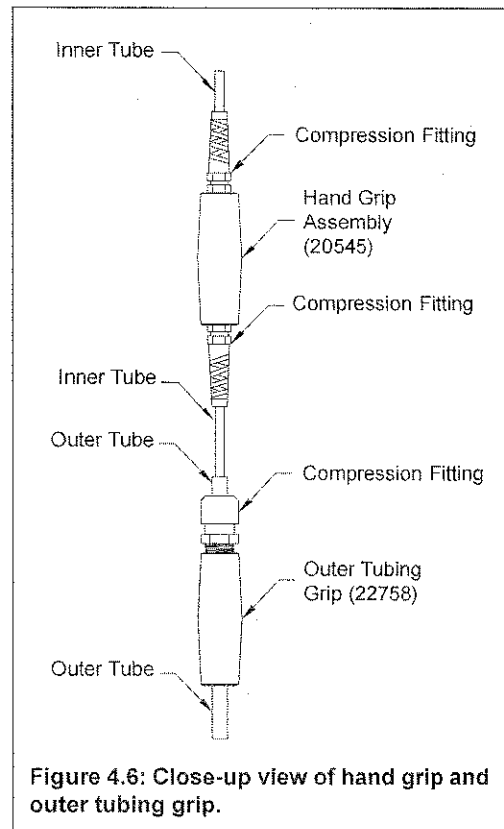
Close-up view of hand grip and outer tubing grip.
